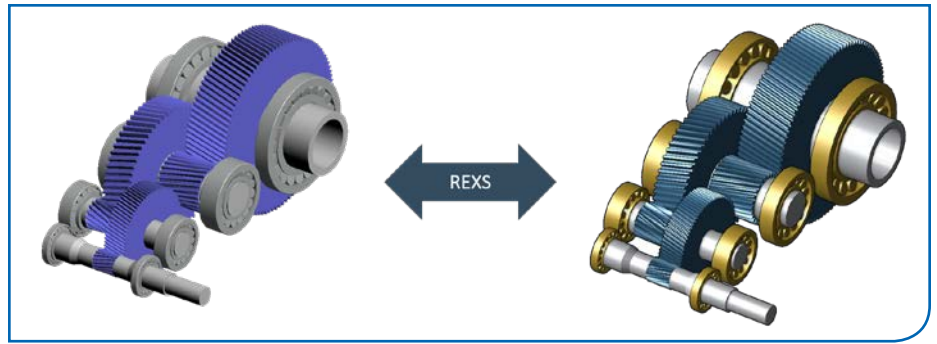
Three-stage parallel shaft gearbox from SEW in *Bearinx* and *FVA Workbench*.
